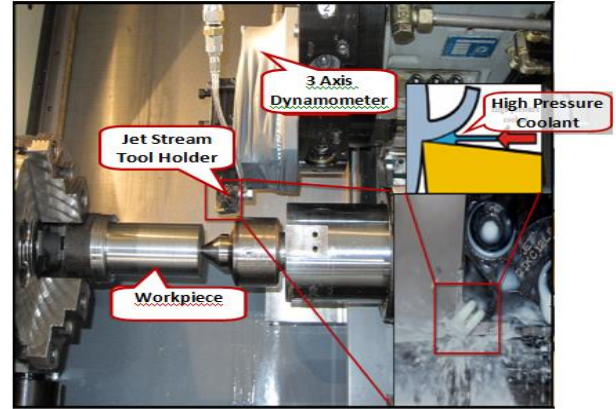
Experimental set-up, and the detailed view of high-pressure injection system [12]
